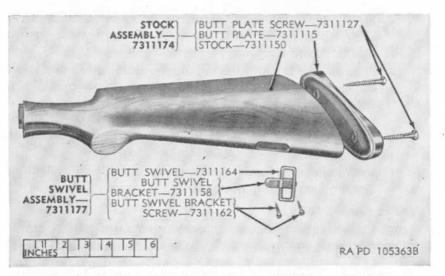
Stock group for Stevens Shotgun M520-30-exploded view.
